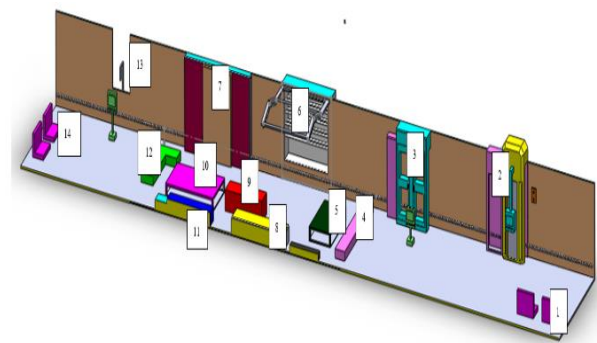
Layout of machines and devices in the heat insulating glass manufacturing process at the current state
